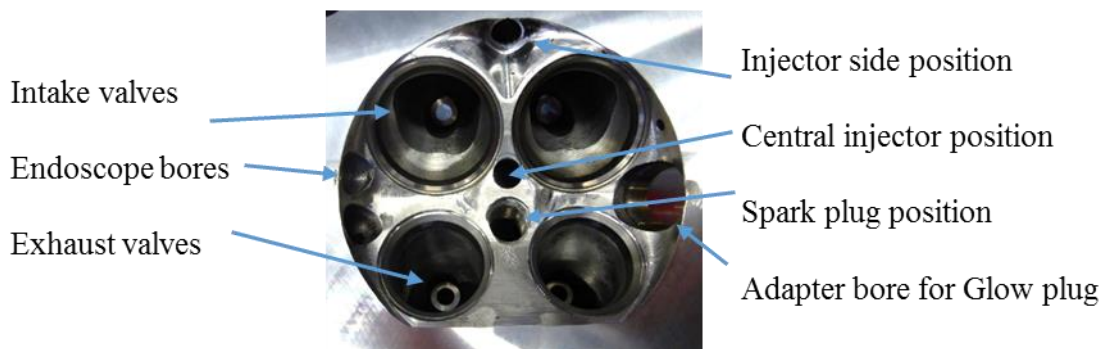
Photograph of cylinder head with access bores; view from the bottom
